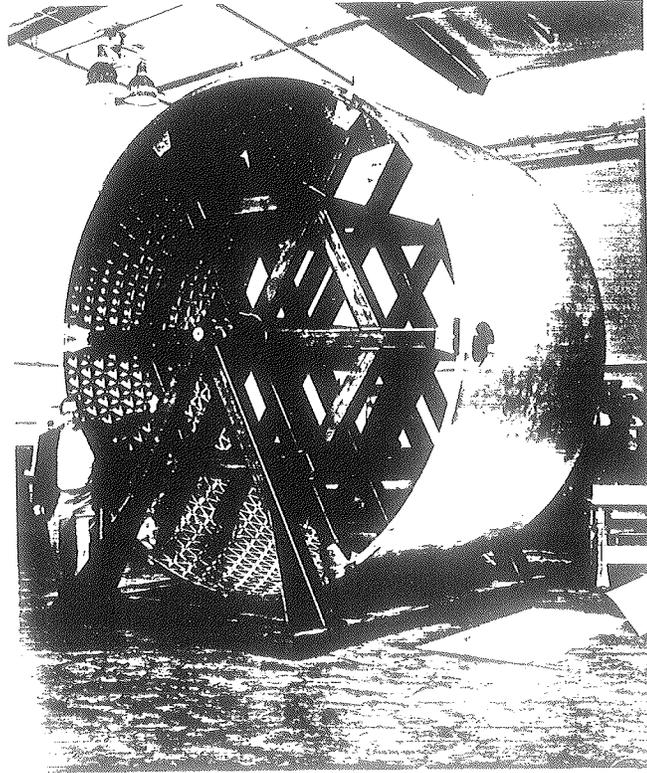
Welded isogrid shell on assembly fixture.
